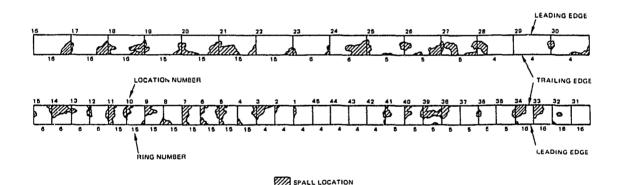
JT9D Sprayed Ceramic Seal Segments Spall Locations After 1825 Extreme Engine Cycles
